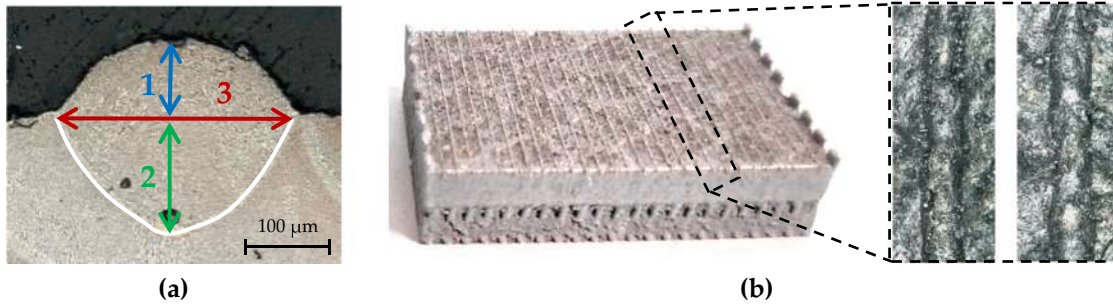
(a) Measured geometrical parameters of the single-track welds; (b) the single-track sample.
